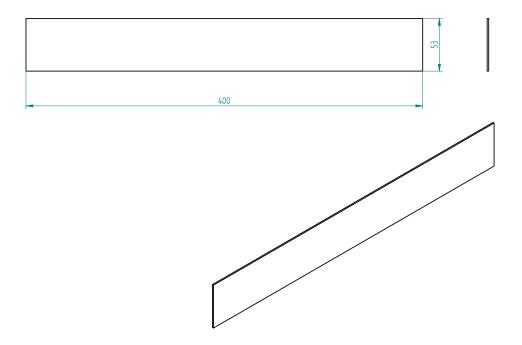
Shaped part : sandpaper for perpendiculator tool
